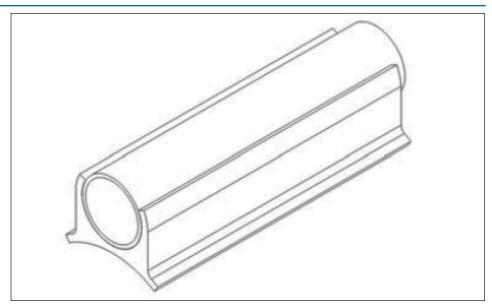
Stainless steel tube in 6063 Al extrusion [3]
